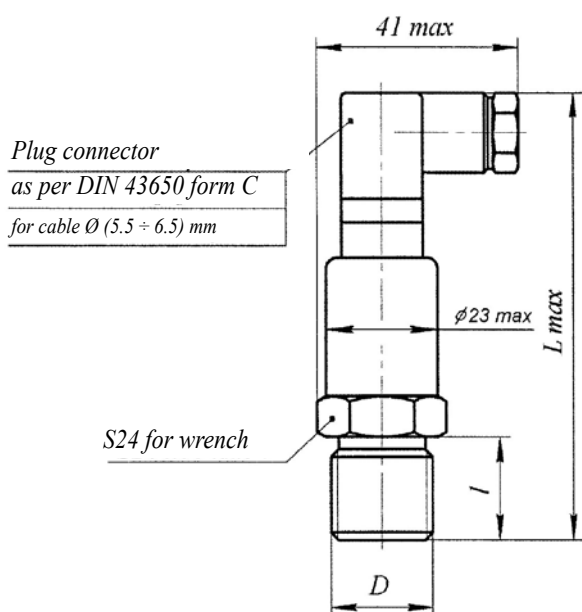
Overall and attachment dimensions for transmitters with M20x1.5; G1/2", G1/4" coupling thread
